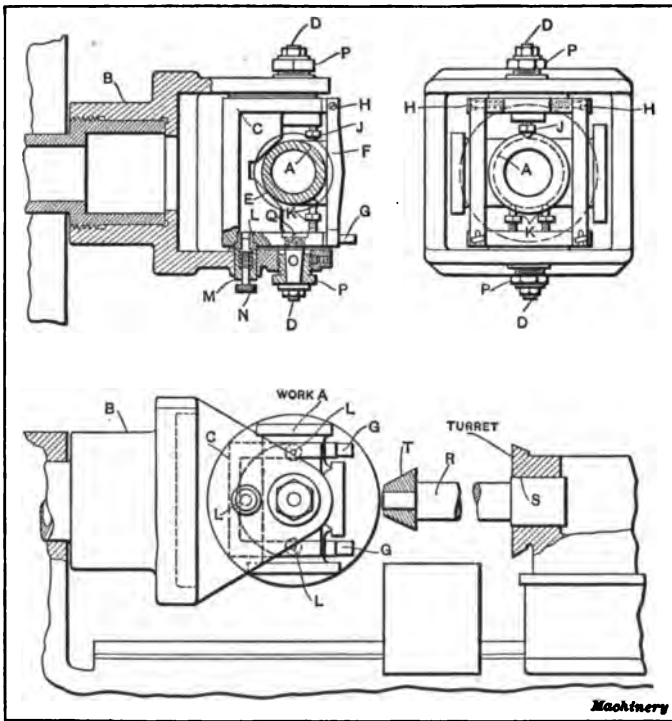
Indexing Fixture for Cast-iron Valve Body
